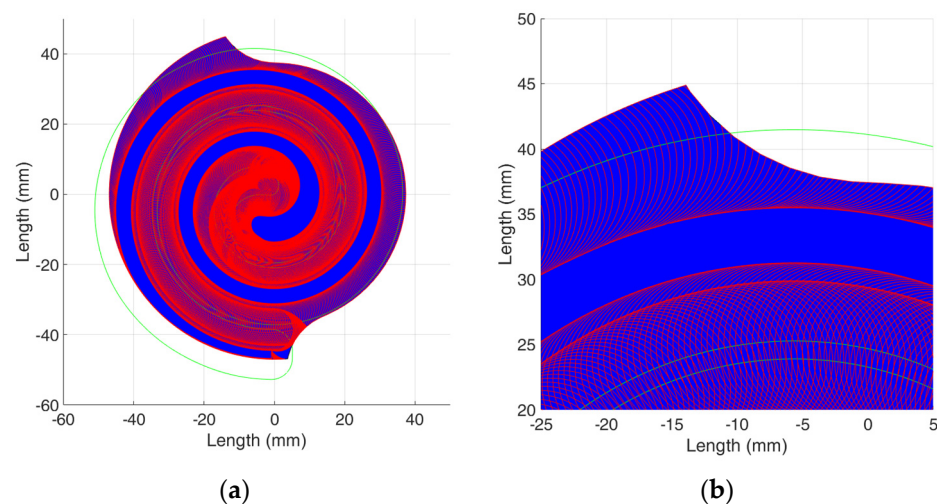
Cutting area intersected by tooth paths and scroll workpiece: (a) full view, (b) zoomed-in view.
